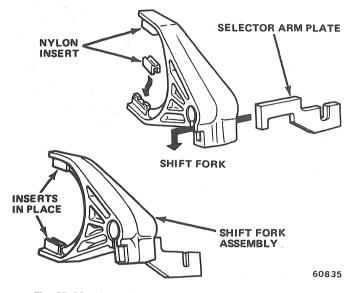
B-23 Assembling Shift Forks and Selector Arm Plates
